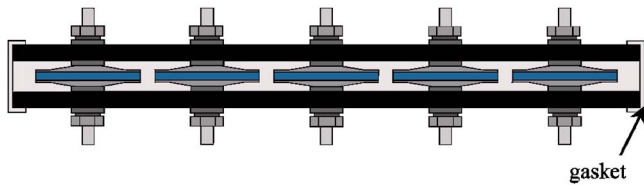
(Color online) Side-view cutaway sketch of the cymbal projector showing the outer gasket in place.
